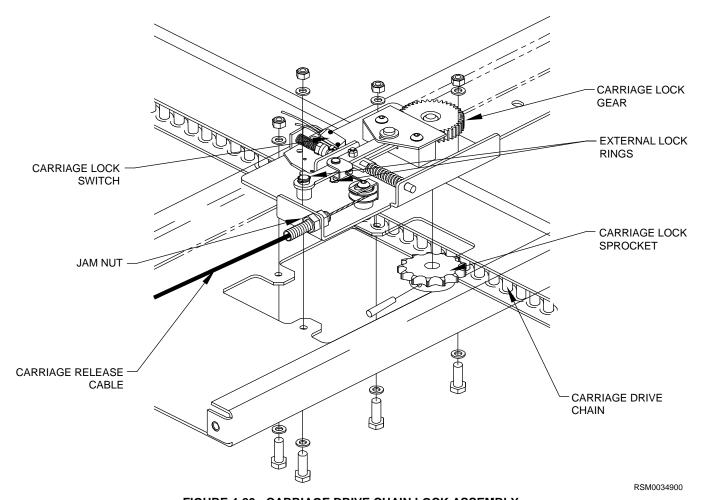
CARRIAGE DRIVE CHAIN LOCK ASSEMBLY
